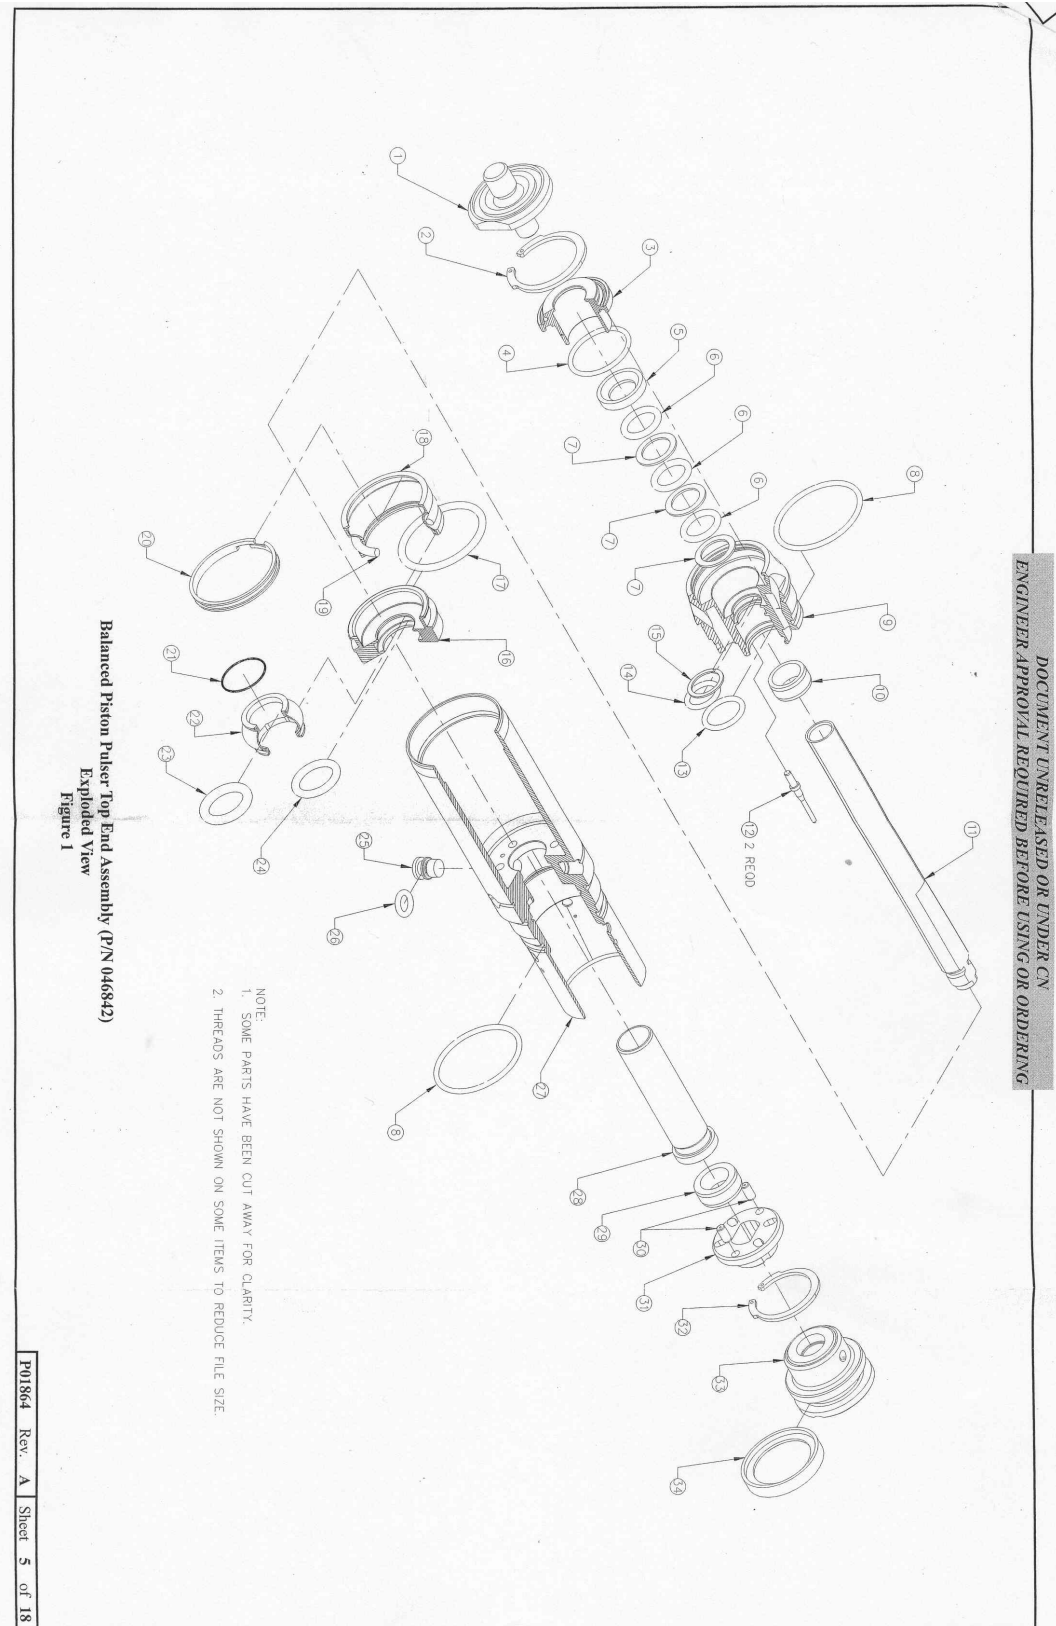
Piston Pulser Top End Assembly (P/N 046842)
